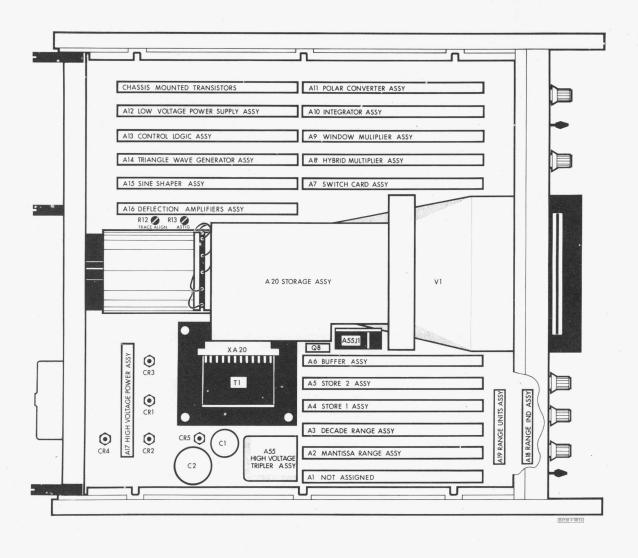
Location of assemblies and chassis mounted components (top view)
